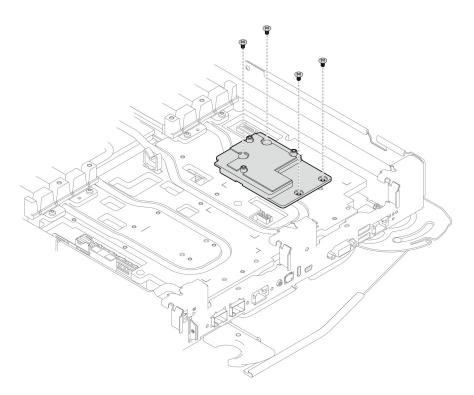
Removing ConnectX-7 NDR 400 riser assembly interface plate
